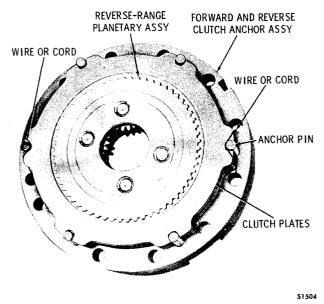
Reverse clutch and planetary assembled for installation into transmission in vehicle
